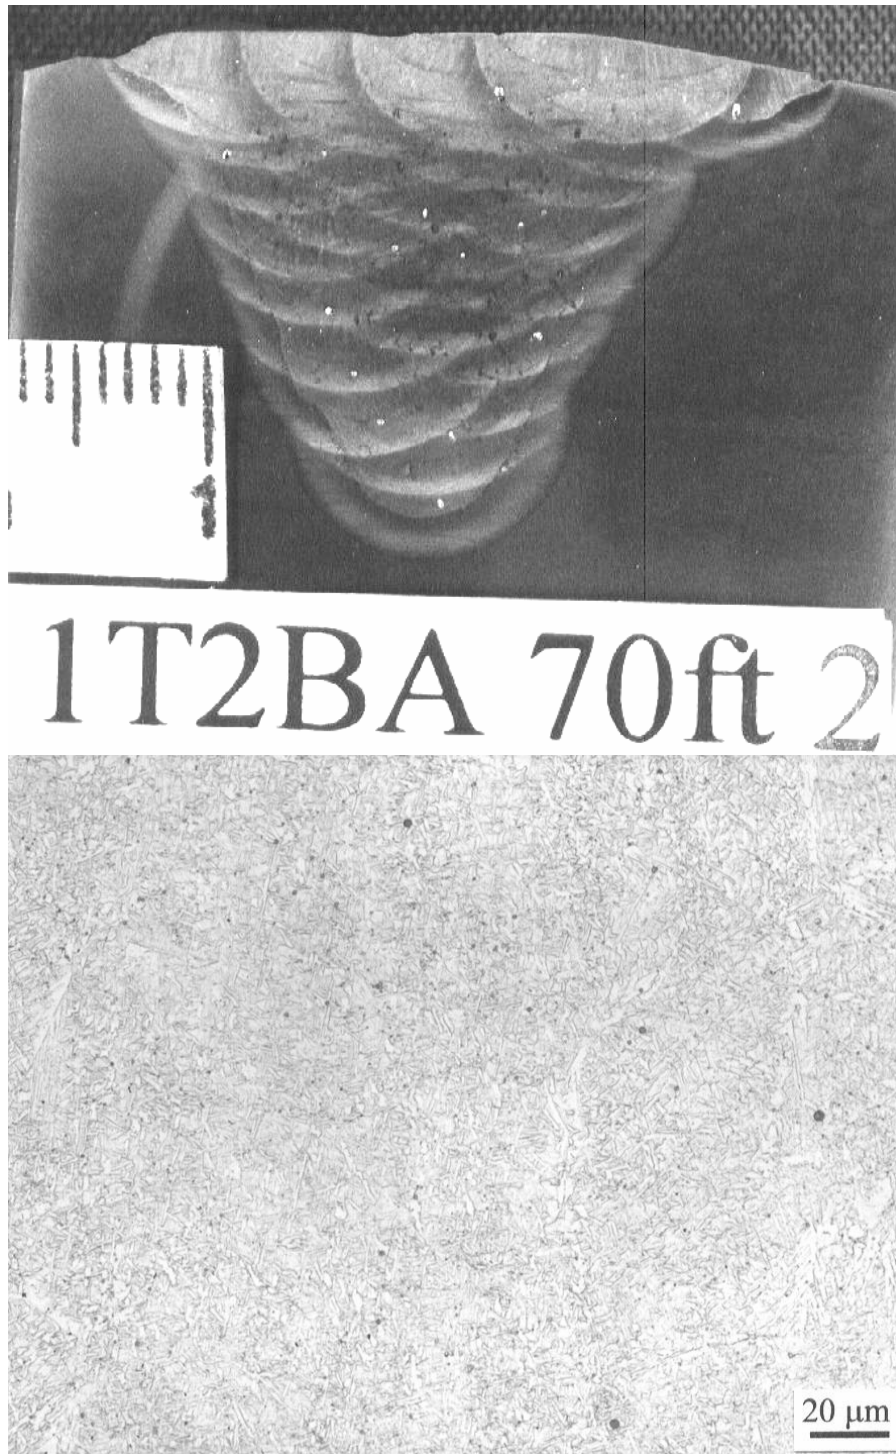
Macro-section and top bead microstructure from 1T2B2 V-groove weld.
